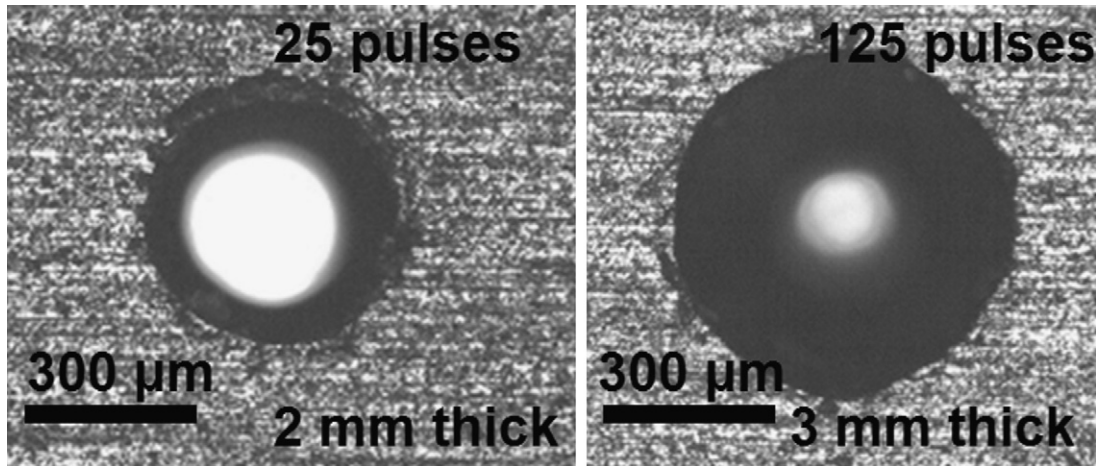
Machining in 2 and 3 mm thick SiC plates. (After Samant et al.⁶⁶).
